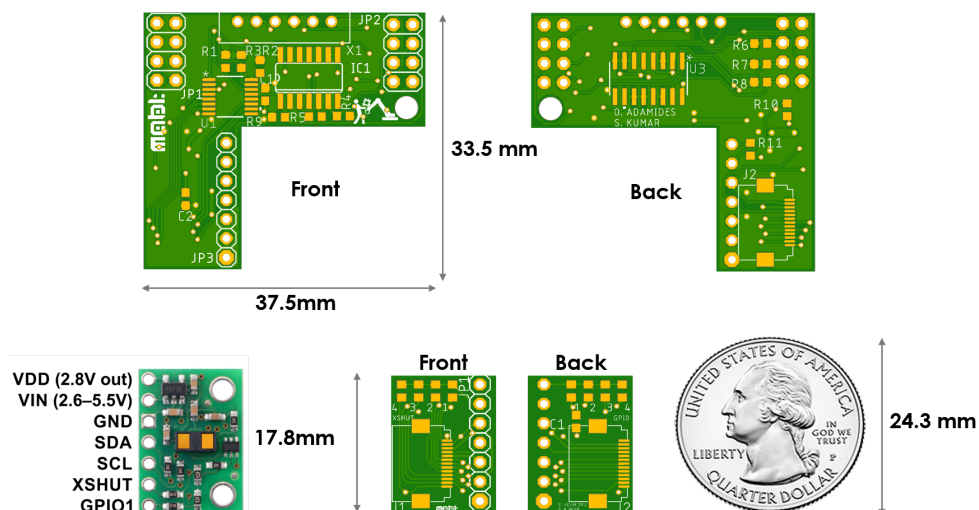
The PCB size comparisons of the ToF Expander nodes, the ToF sensor nodes and the Pololu VL53L1X breakout board.
